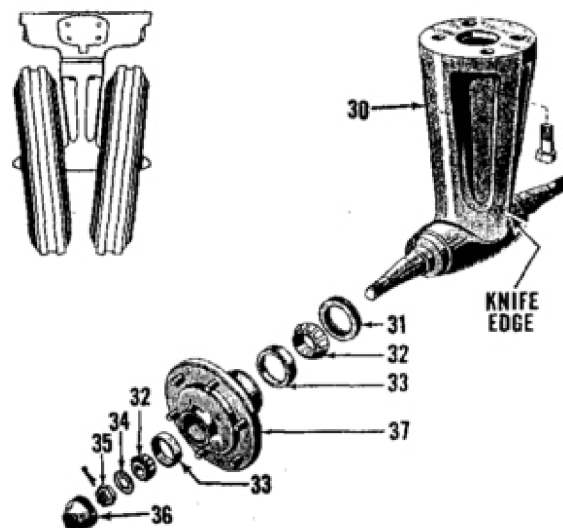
Exploded view of dual wheel tricycle spindle and wheel hub unit. Note that knife edge of spindle must be towards front of tractor. Unit is interchangeable with wide adjustable front axle or single front wheel.
